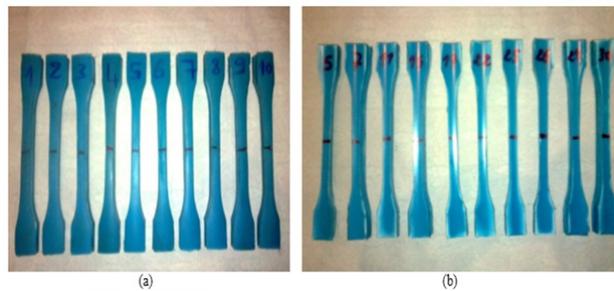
Notched specimens a) from the outside of the pipe to its inside (External notches) b) from the inside of the pipe to its outside (Internal notches).
